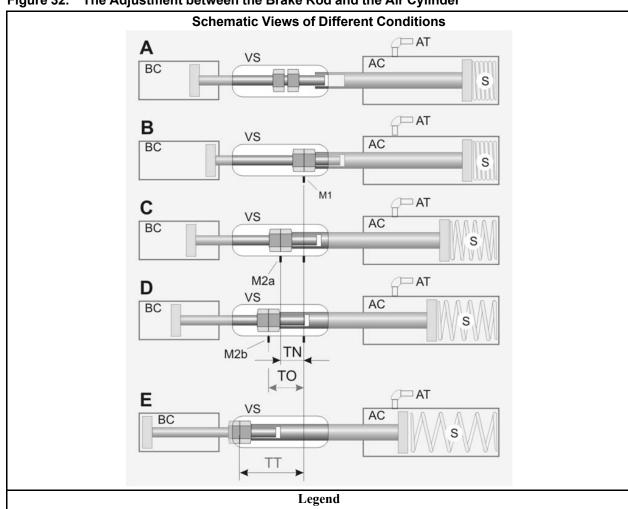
The Adjustment between the Brake Rod and the Air Cylinder
